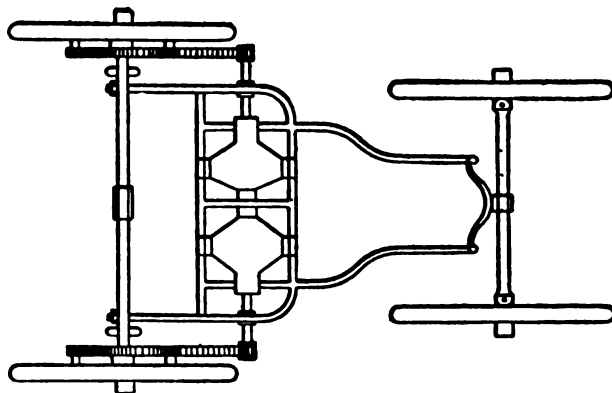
A TUBULAR FRAME FOR AN ELECTRIC CAR, SHOWING THREE-POINT SUSPENSION.
